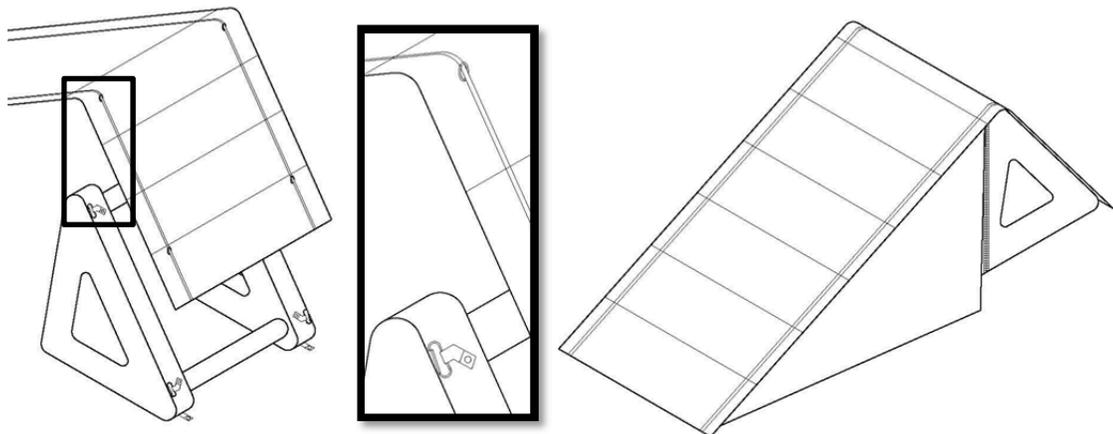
(Left & Middle) Grommet detail found at the hypotenuse should be replaced with new carabiner detail. (Right) New hardware should be added to the walls of the inflatable structure.
